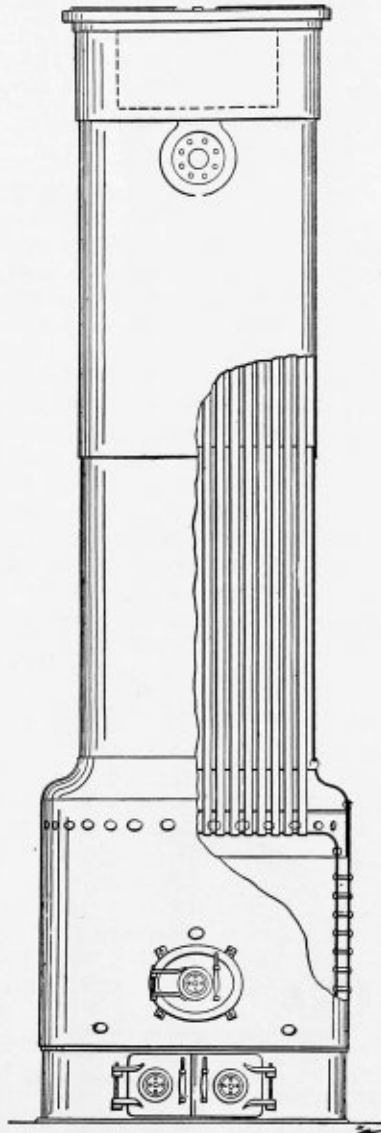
PART SECTIONAL VIEW OF MANNING BOILER.
